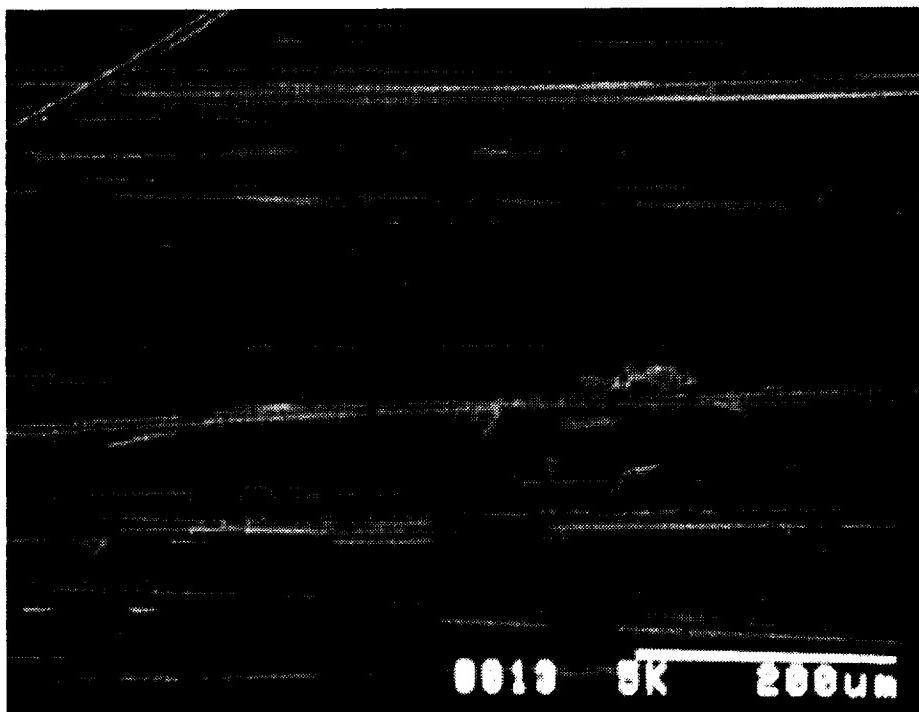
Surface Fracture of 15 second Weld at 1.75kW, 120kHz and 0.345MPa.
